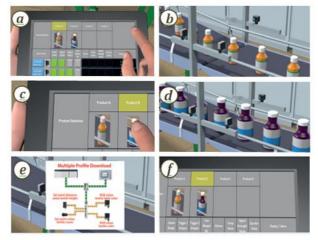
Adjusting the production process to manufacture another product using smart sensors
